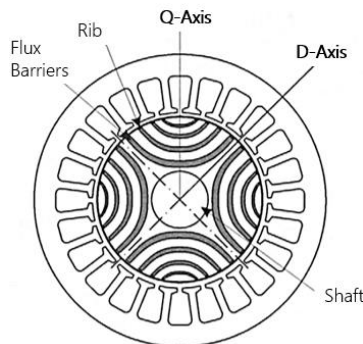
Cageless Flux barrier rotor, courtesy of [11]
